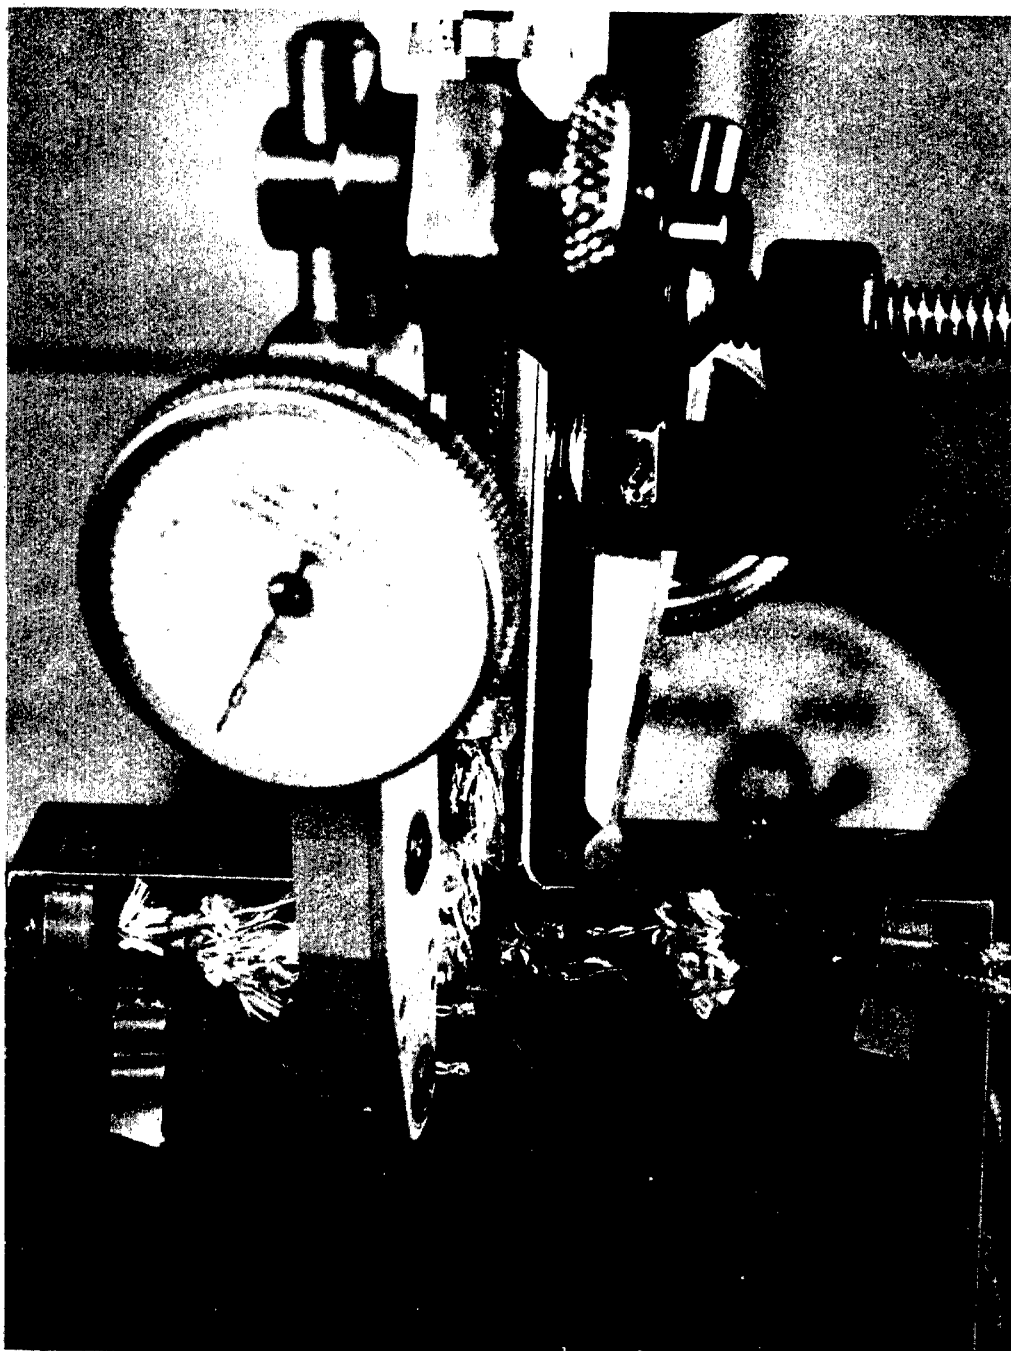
Blade-to-Disc Pinned Attachment Test Fixture With Radial Displacement Indicator.
